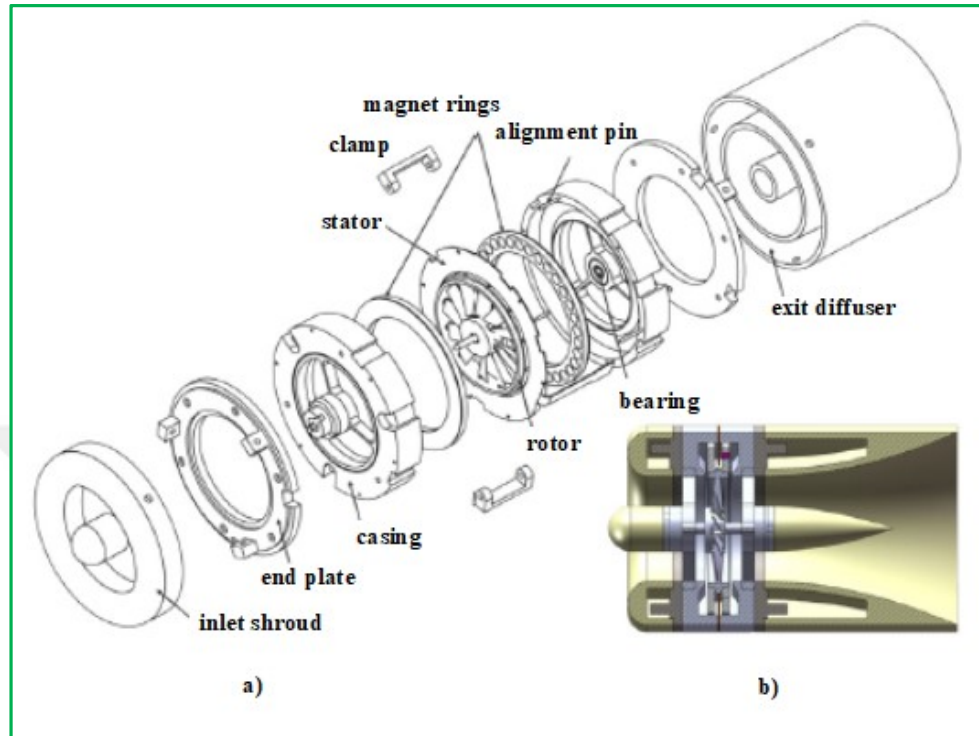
A miniature type of wind turbine, a) exploded components, and b) its shrouding (Howey et al., 2011)
